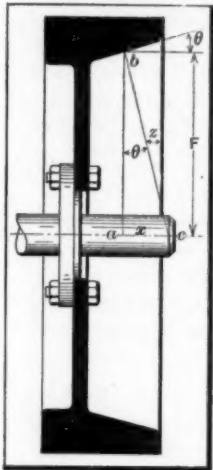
Section of a flywheel showing the method of flanging without a locking means for the nuts on the holding bolts
